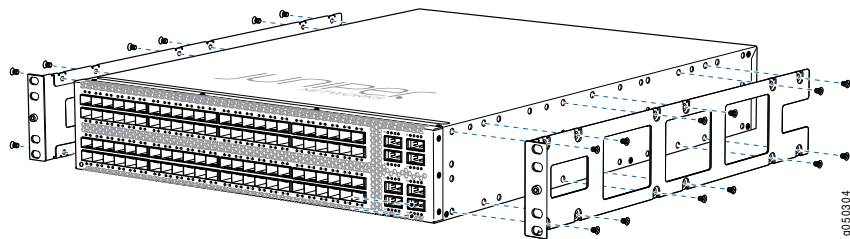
Attaching Mounting Rails to the QFX5100-96S
